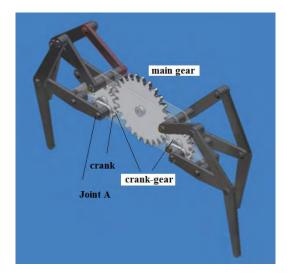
11: The design of Klann mechanism crawler robot [18].
